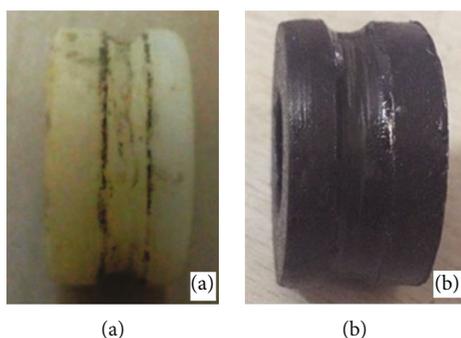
(a) Inner ring of nylon bearing. (b) Inner ring of GO-GFN bearing.
